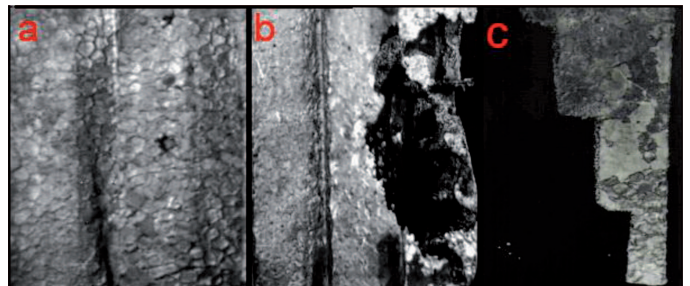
Errors on castings: a) castings lumpiness of surface reproduced from the pattern, surface porosity, fold; b) metal penetration into sand; c) sintered sand on the castings surface
